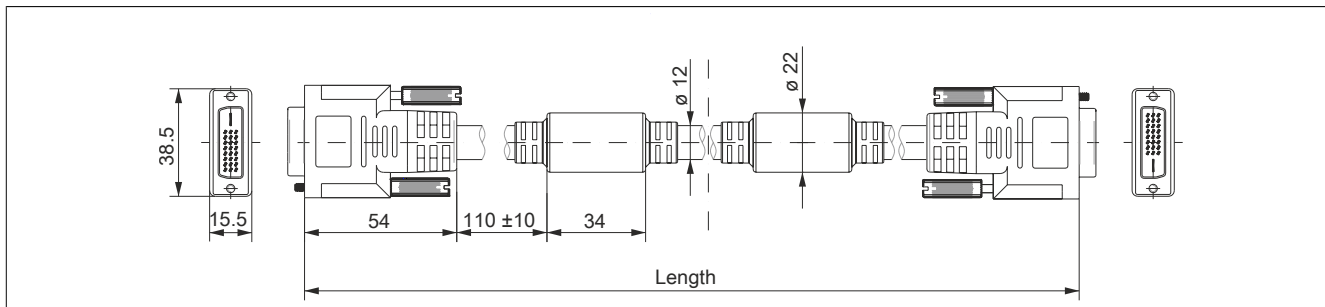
5CASDL.0xxx-03 ≥Rev. E0 - Dimensions
